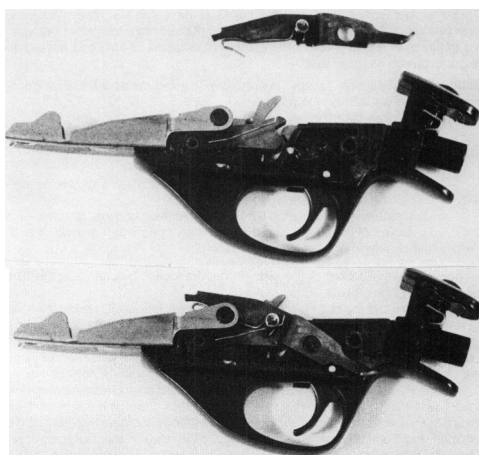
Top: Savage slide lock and trigger group. Bottom: Correct assembly.
